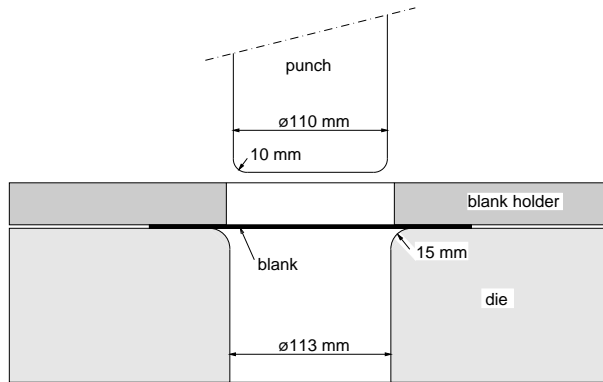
Dimensions of the tools for cylindrical cup deep drawing.
